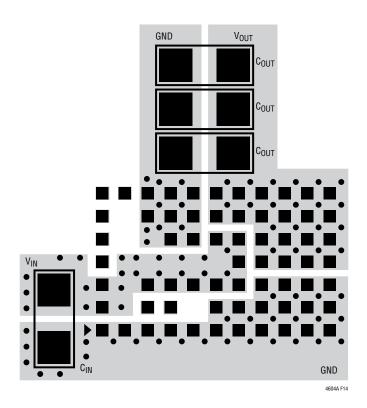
Recommended PCB Layout (LGA Shown, for BGA Use Circle Pads)
